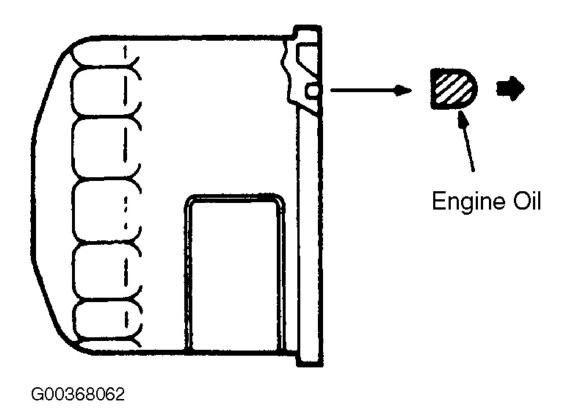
Illustrating Oil filter Courtesy of KIA MOTORS AMERICA, INC.
